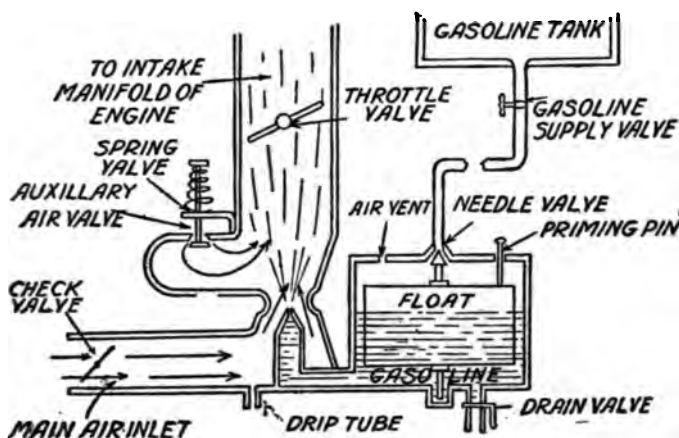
CROSS SECTION OF A SIMPLE CARBURETOR
